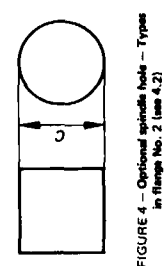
Optional spindle hole - Types in flange No. 2 (see 4.2)
